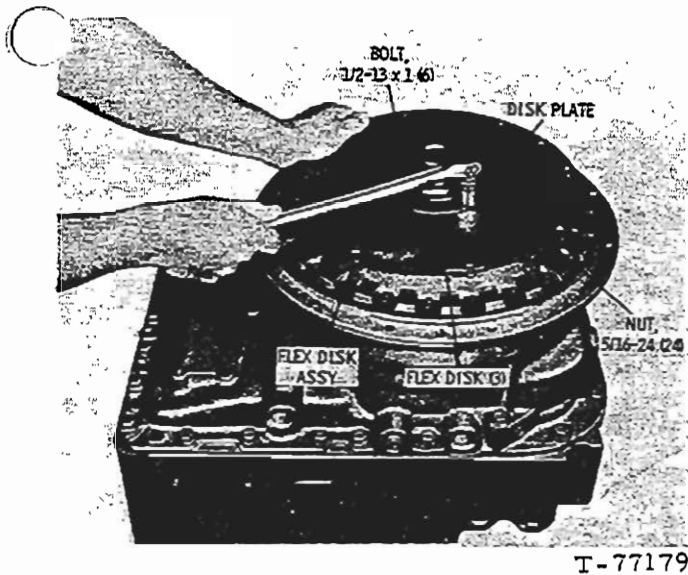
INSTALLING FLEX DISK ASSEMBLY (DIRECT MOUNT)
